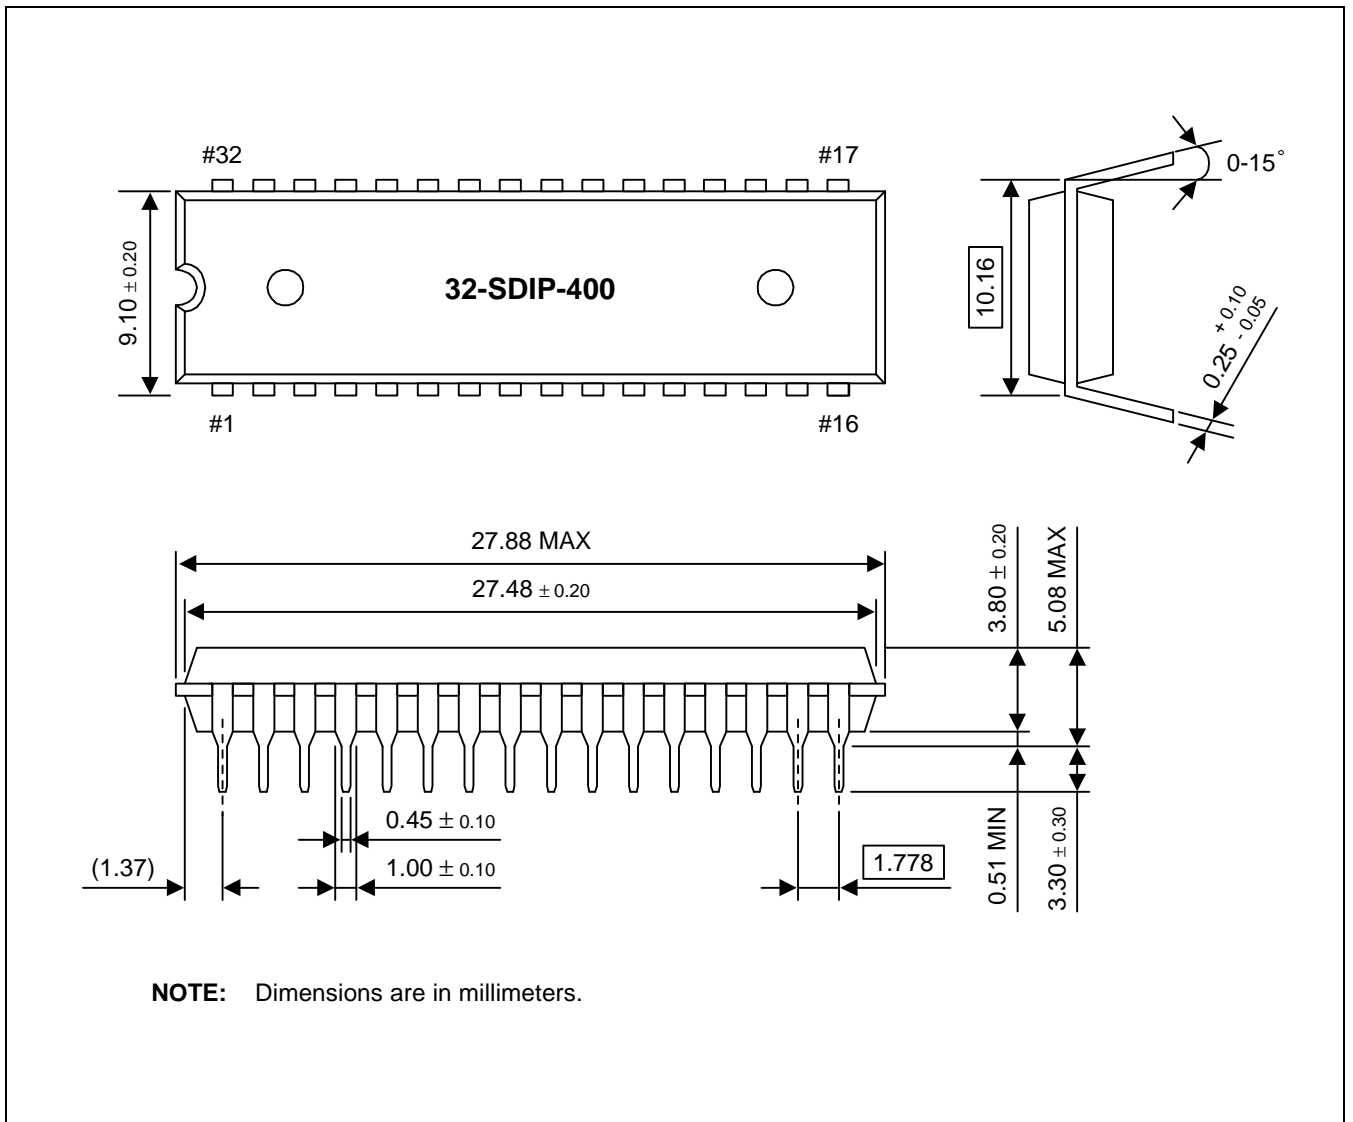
32-Pin SDIP Package Dimensions (32-SDIP-400)
